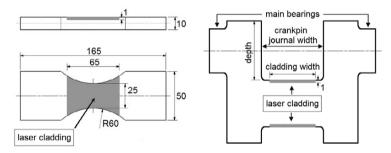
Top and side view on flat specimen (left) and cross-sectional view on crankshaft segment (right)
